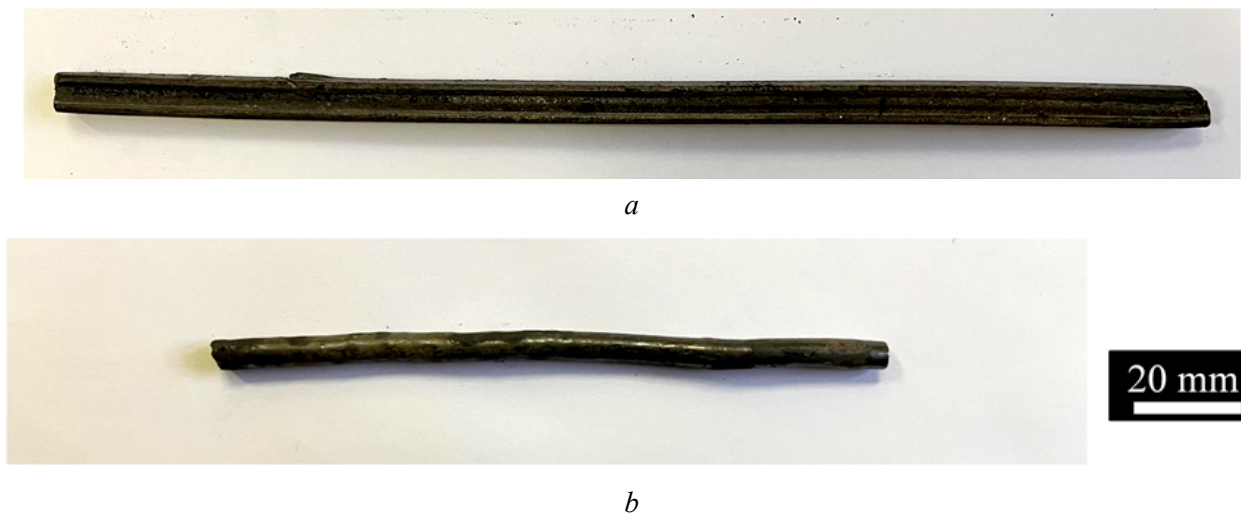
Photograph of a *TiNiHf* alloy rod after caliber rolling (a) and rotary forging (b)
